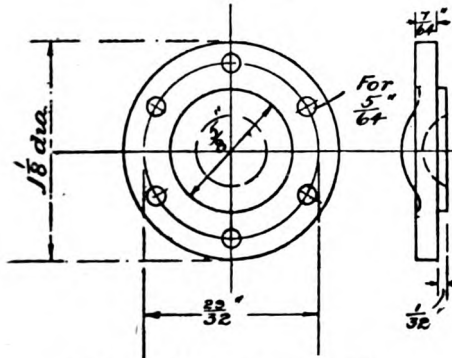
HIGH-PRESSURE FRONT CYLINDER COVER.
